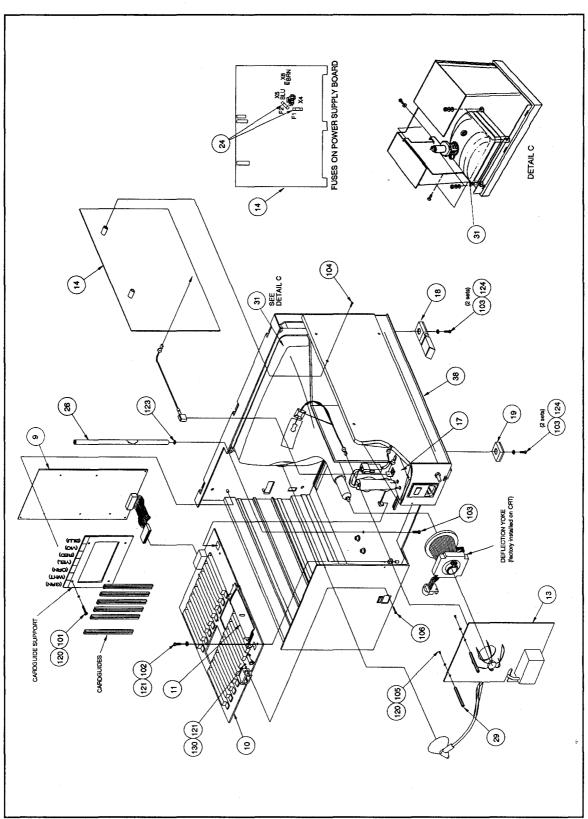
SIRECUST 1280/1281 Monitor Parts/Assembly (Sheet 3 of 5)
